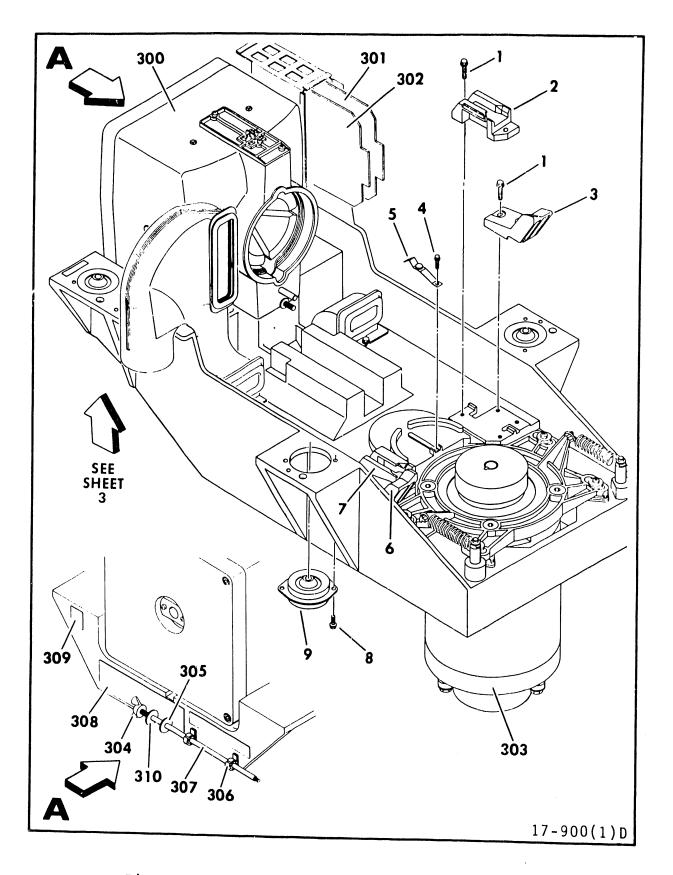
A-9. Deck Assembly (Sheet 1 of 2)
